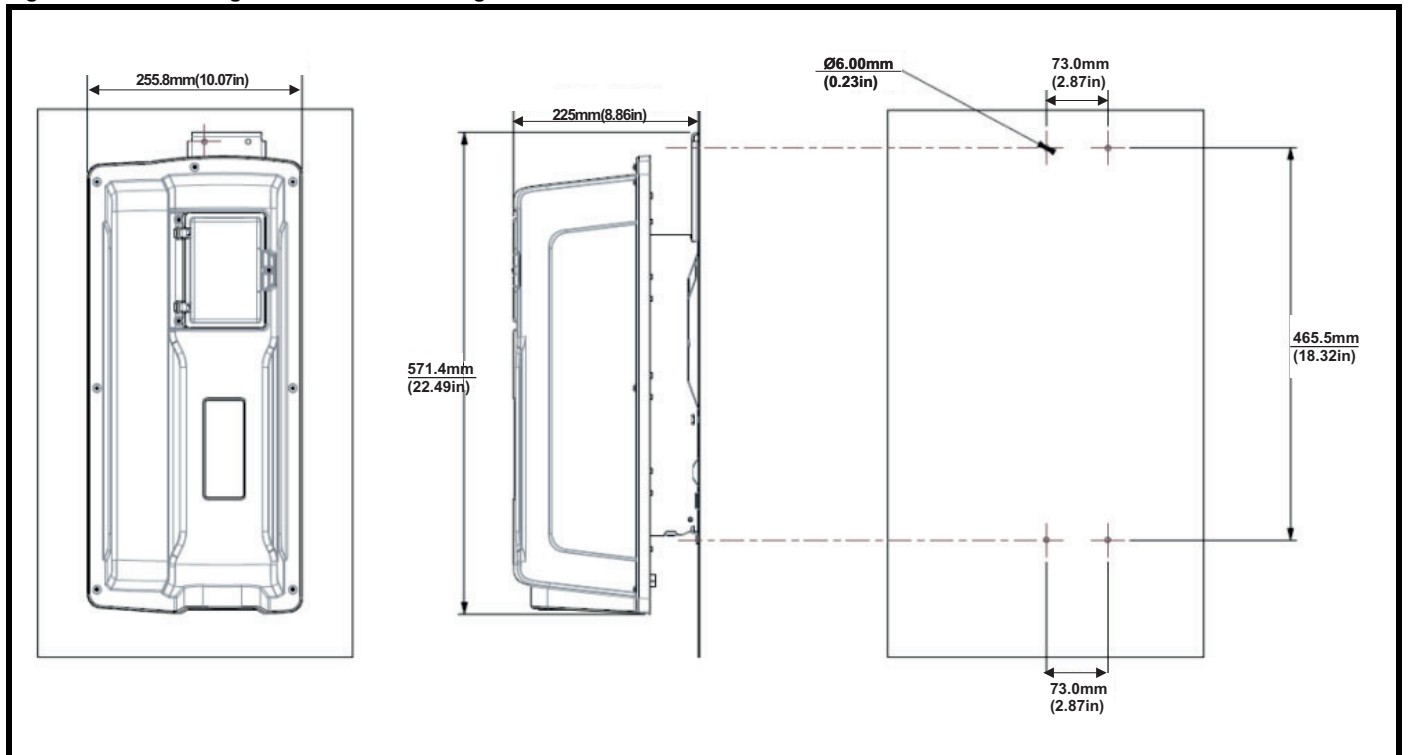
Size 4 High IP Drive and Mounting Hole Dimensions
